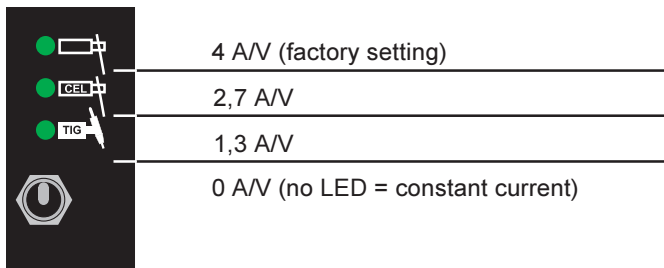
CEL welding: "Characteristic" parameter setting
